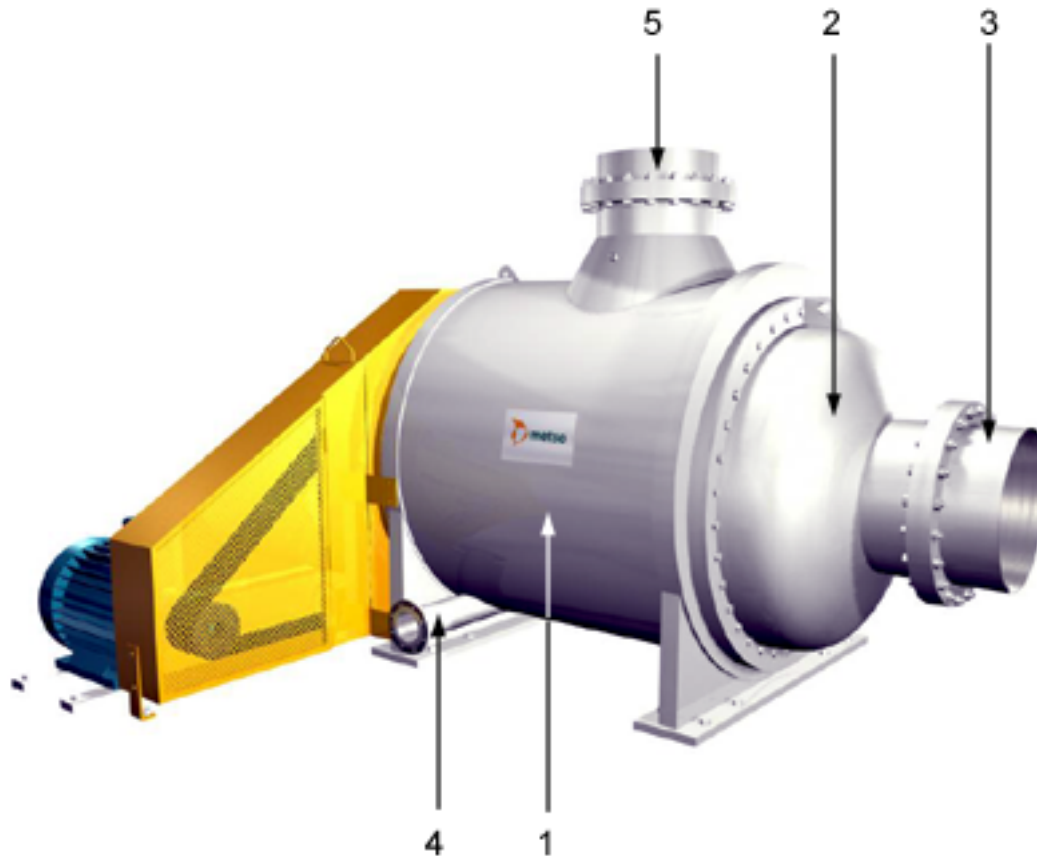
Construction of the OptiScreen MS-HA machine screen (STOA009533)
